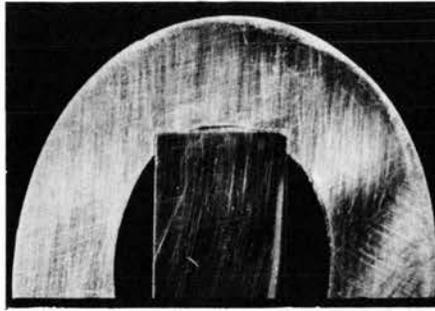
Cross section of wire and terminal showing metal-to-metal contact.
